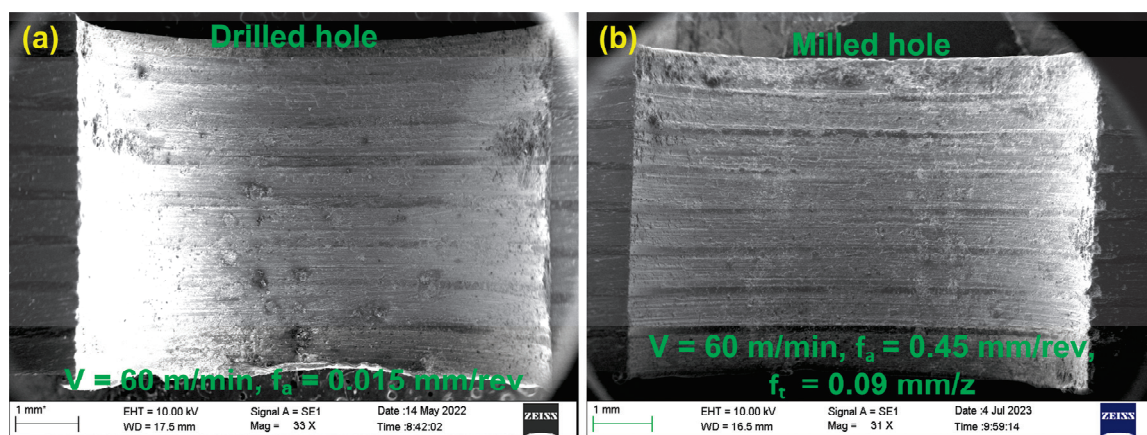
Holes with good surface finish were observed during (a) drilling and (b) helical milling.
